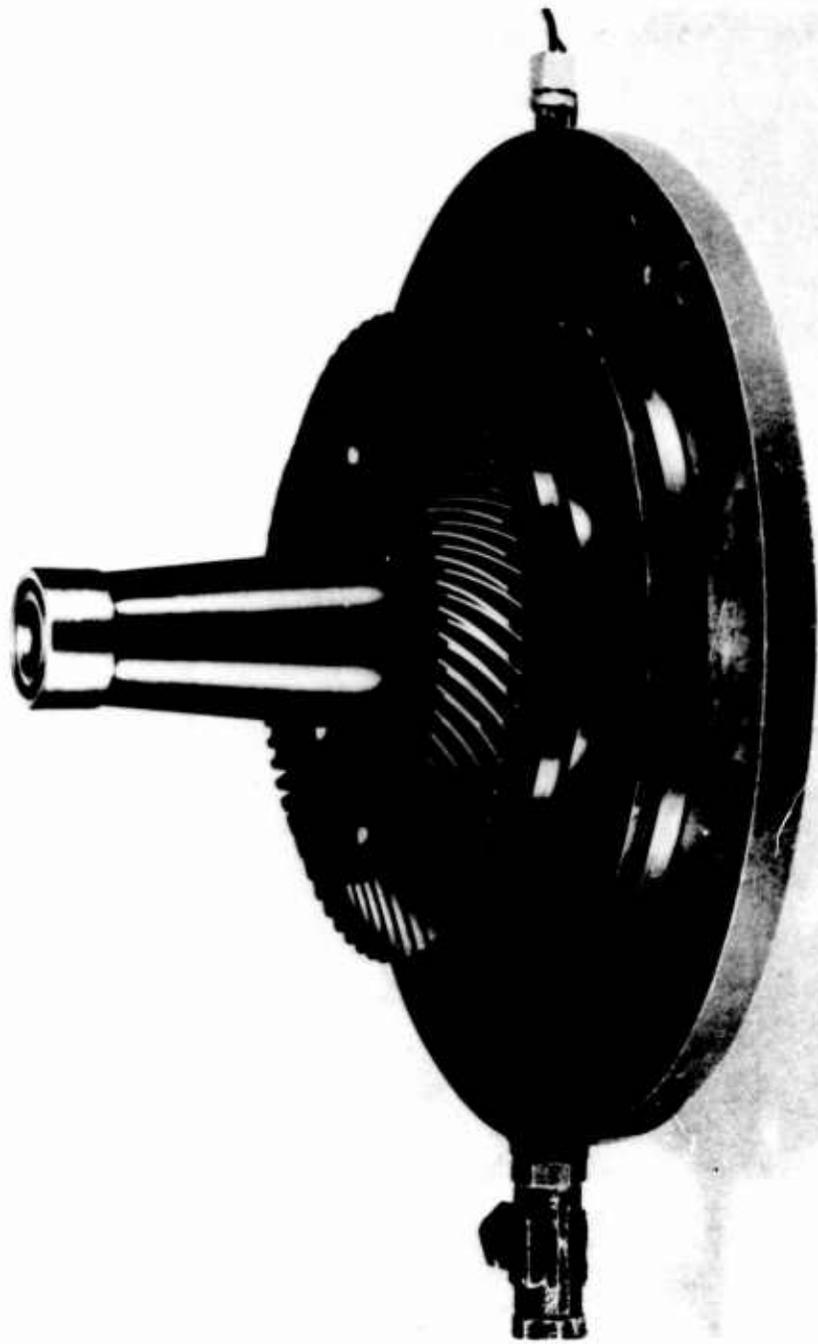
Bevel Gear and Pinion Inner Roller Bearings.
